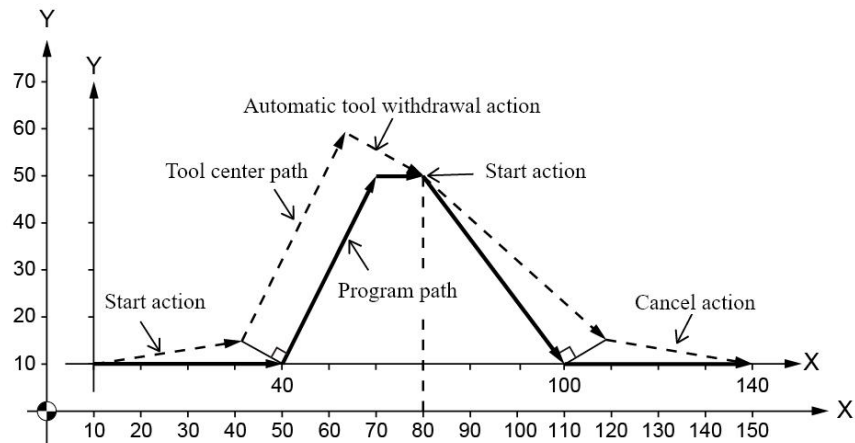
10Automatic Tool Withdrawing with Moving Command
